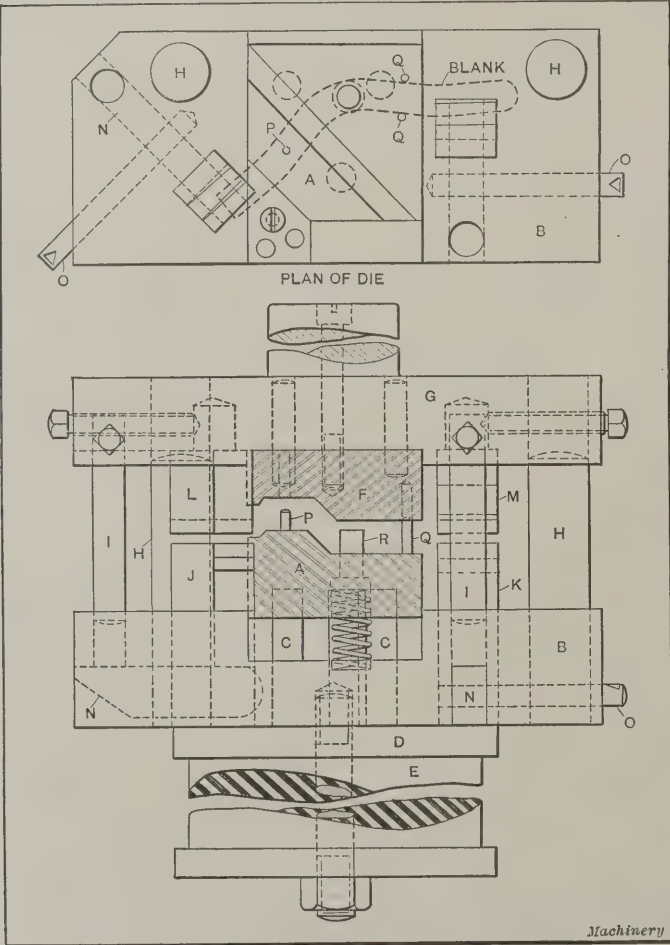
Elevation and Plan Views of the Combination Bending and Twisting Die
